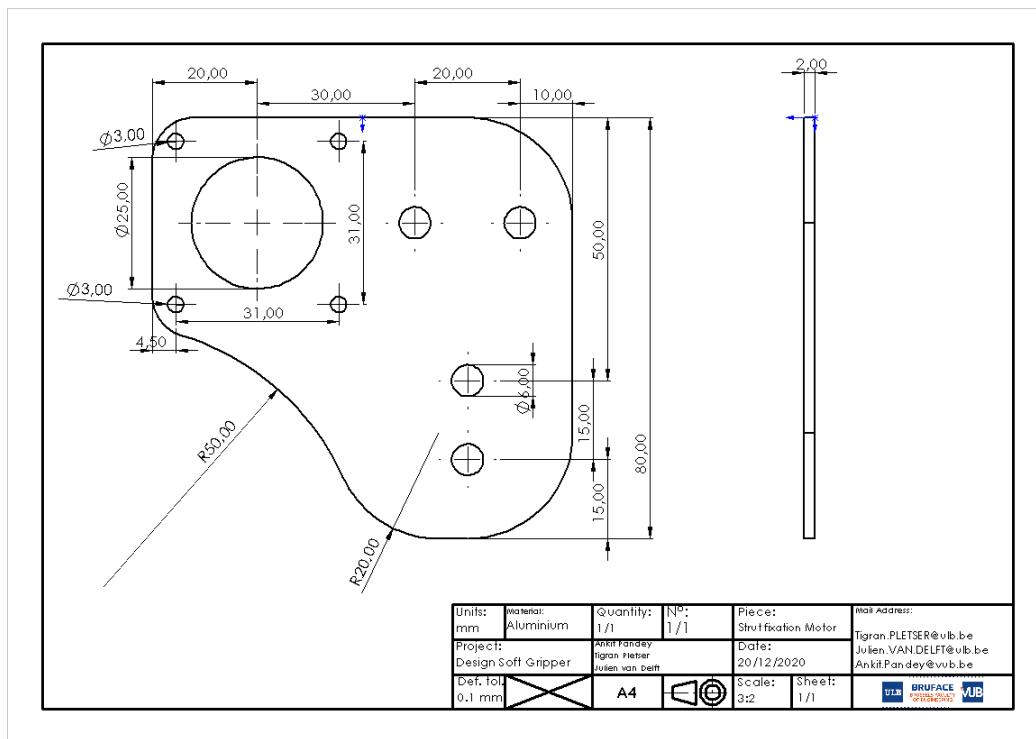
Strut profile fixation on the power shaft side to fix the motor technical drawing
